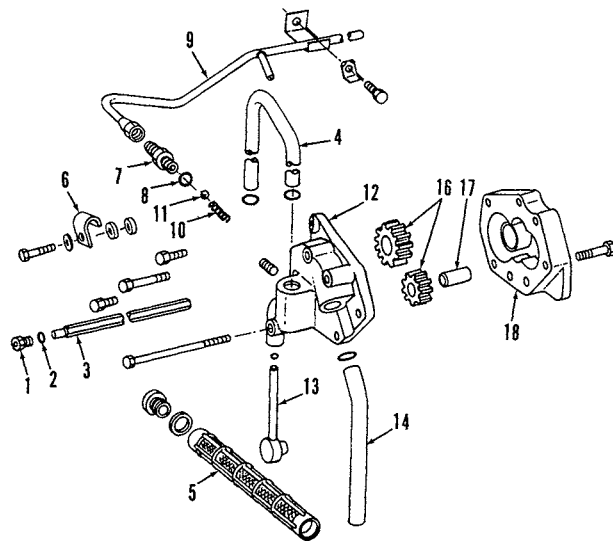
Exploded view of Quad-Range transmission oil pump and associated parts used in 4050, 4250 and 4450 models.
